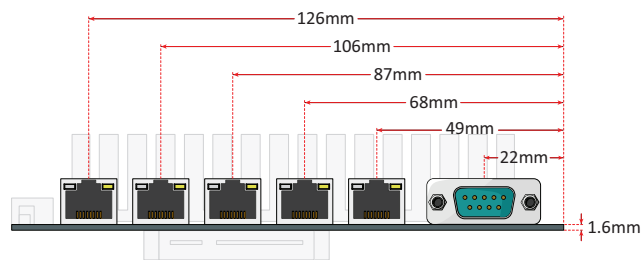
External I/O port dimensions of the VB9001 (back panel)
